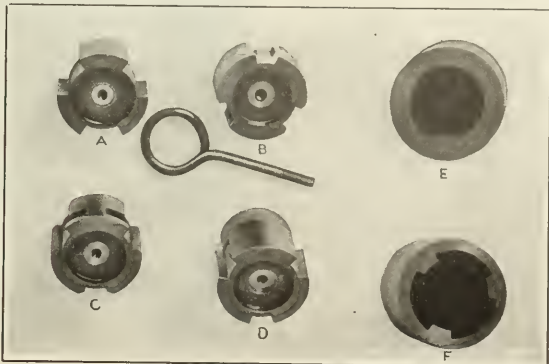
Recoil Cylinders and Gages used to test Slotting
